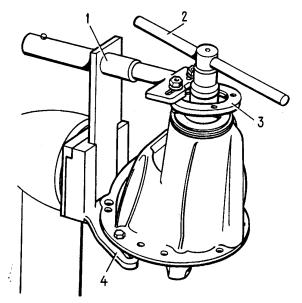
Turning off Drive Pinion Nut: 1 - drive pinion flange retainer; 2 - socket wrench; 3 - drive pinion flange; 4 - bracket
